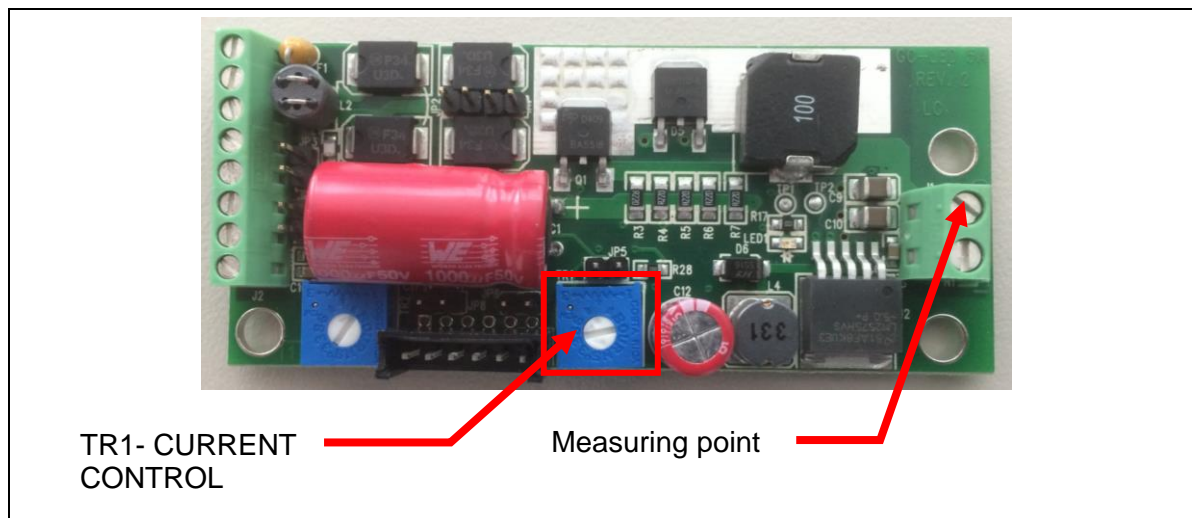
GC-LED 5A PCB (Timer PCB), new version
